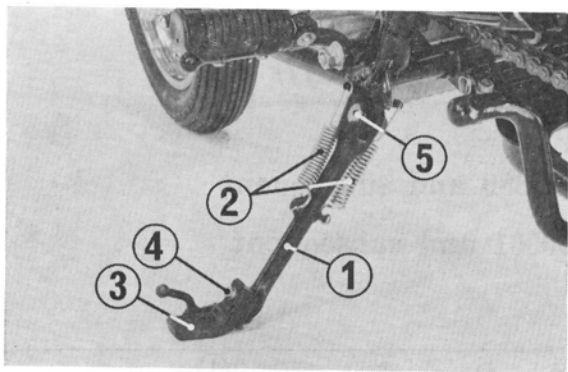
① Side stand bar ④ 6 mm bolt
